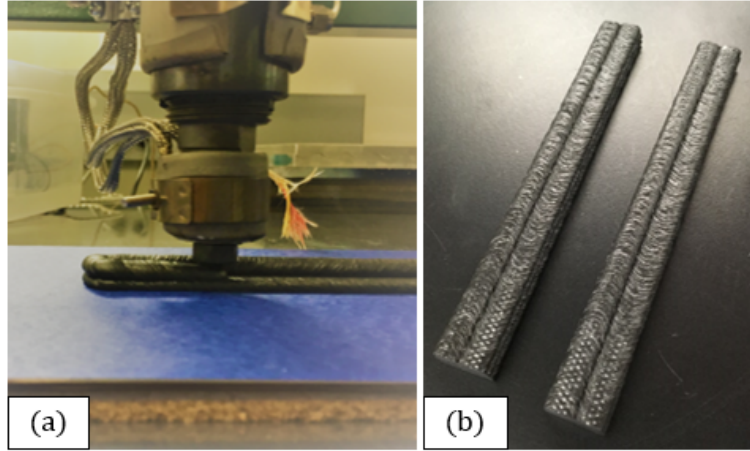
(a) Baylor LAAM extruder, printing a strip (photograph filtered for better lighting). (b) Tensile specimens.
